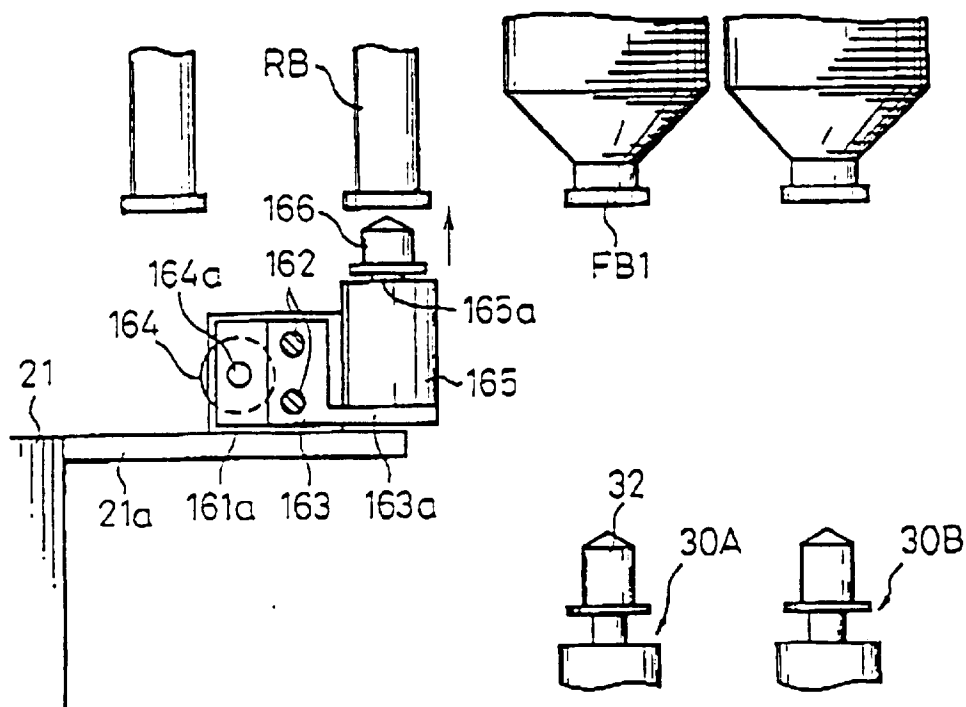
(a) Fig. 28(b) Fig. 28(c)
